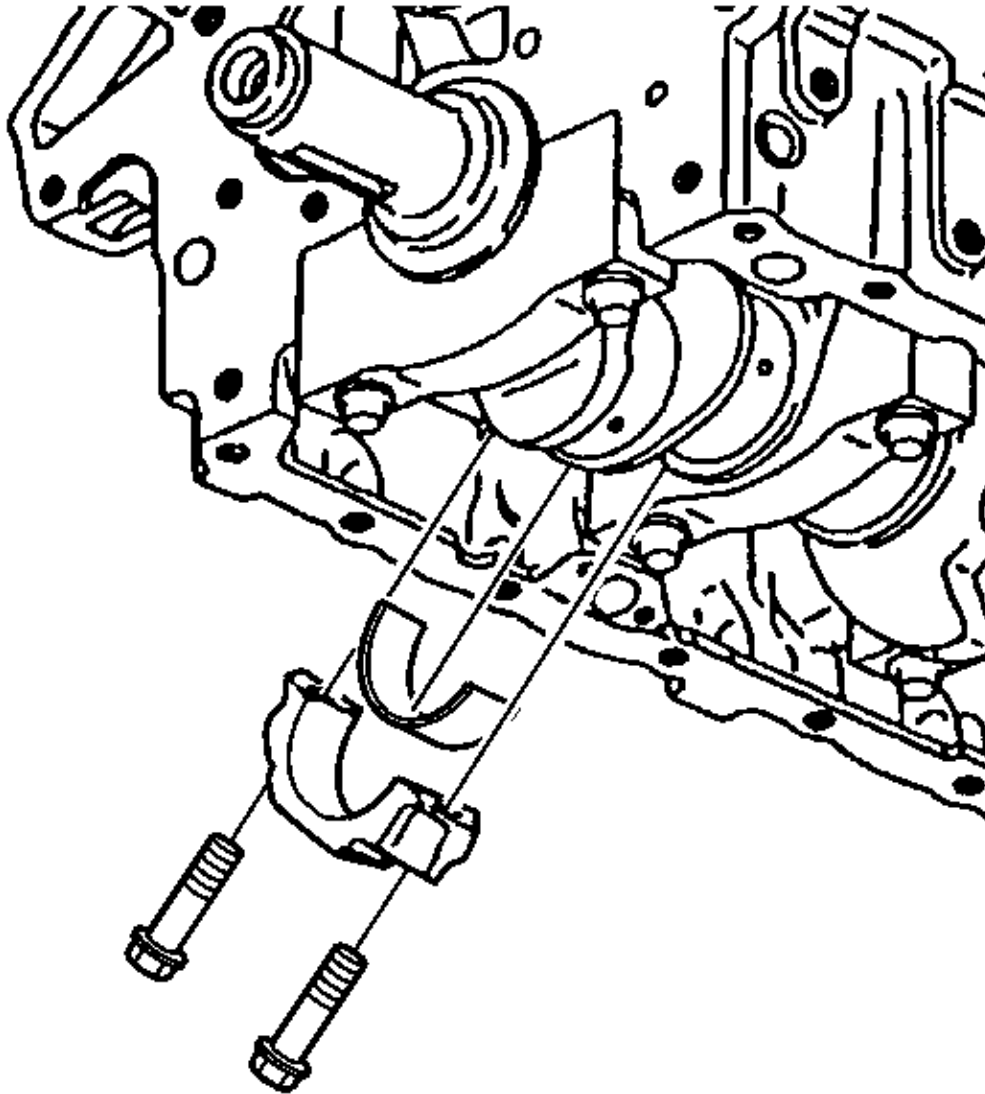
Installing Lower Connecting Rod Cap & Bearing
